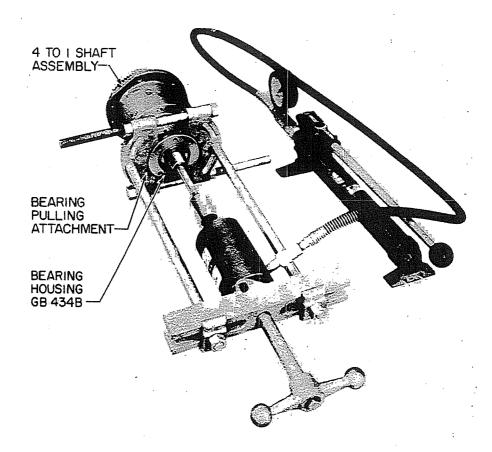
4 to 1 Shaft, Removal of Bearing Housing GB434B
